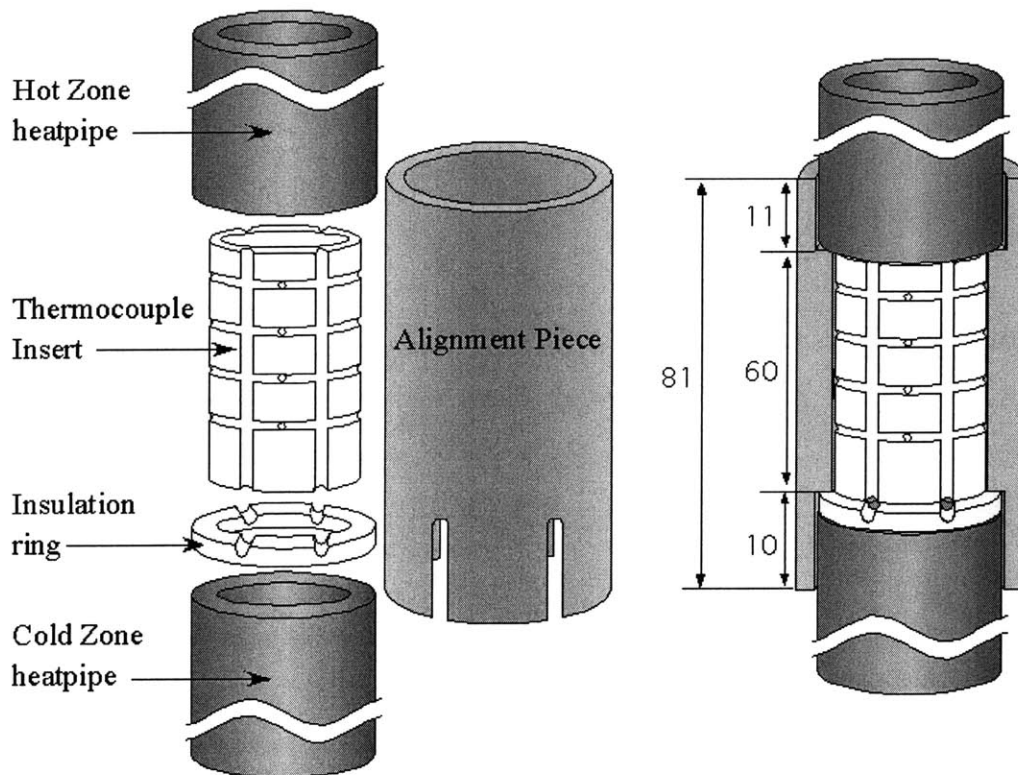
Exploded and assembled views of alignment pieces designed for gradient zone. Dimensions in millimeters.
